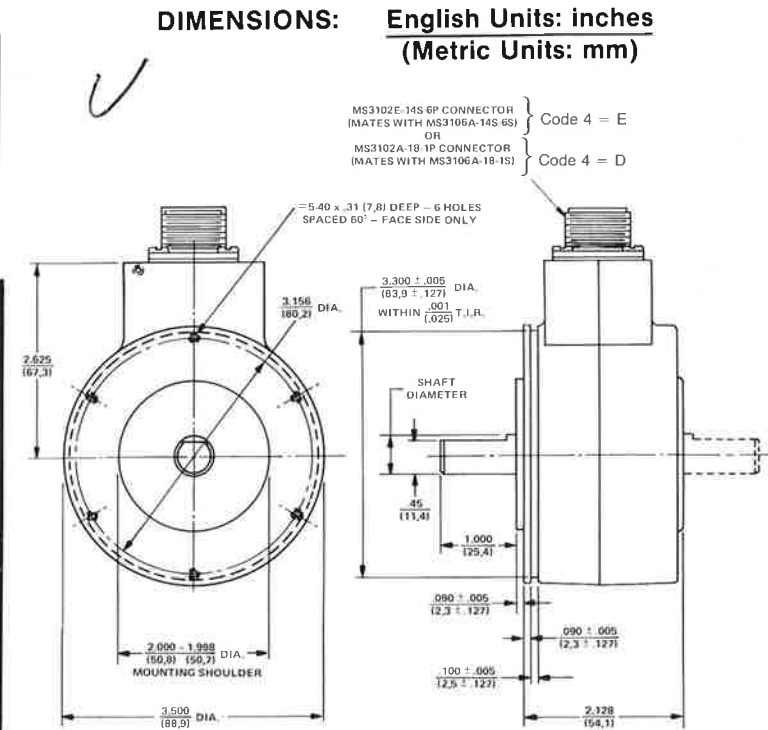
Standard Unit With 6-Hole Front Face Bolt Circle Mount & Servo Ring Mount
